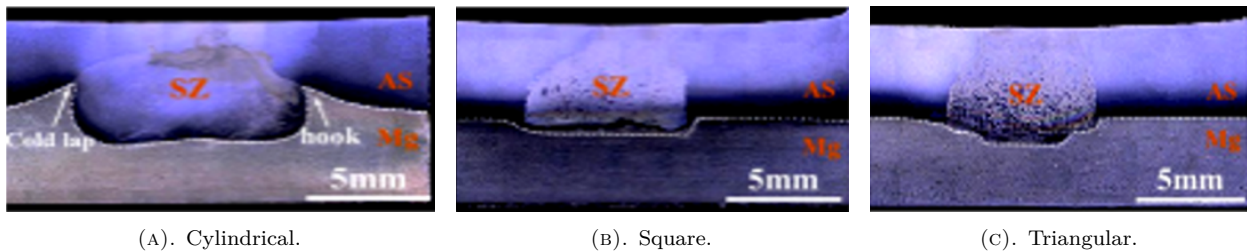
Joint macrostructure of welded samples using different tool pins [39].
